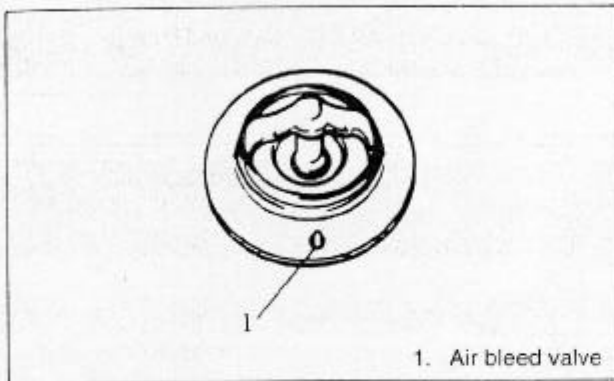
B — 13 AIR BLEED VALVE OF THERMOSTAT
